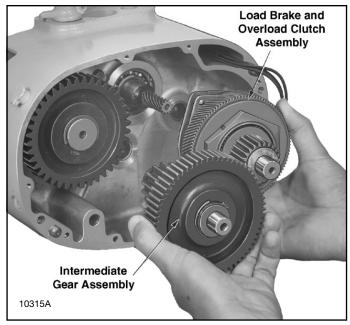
Removing Load Brake and Clutch and Intermediate Gear Subassemblies (1 through 3 Ton Hoists)
